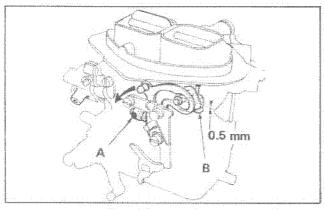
Fast idle screw (A) & choke adjustment (B) (DIR)
